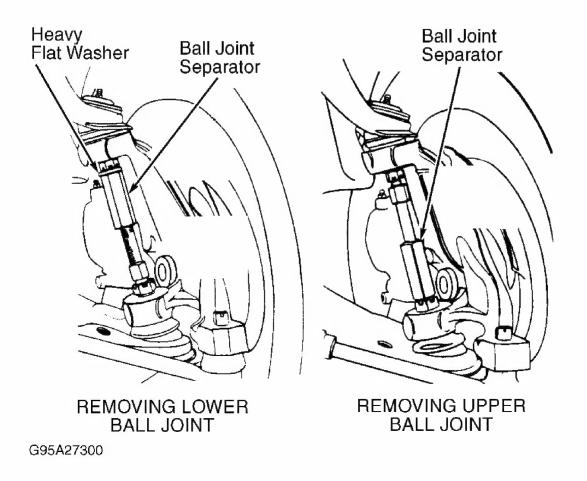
Separating Upper & Lower Ball Joints From Steering Knuckle Courtesy of GENERAL MOTORS CORP.
